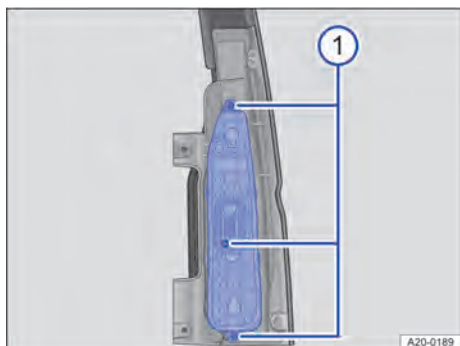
On the tail lamp cluster: removing the bulb holder.
